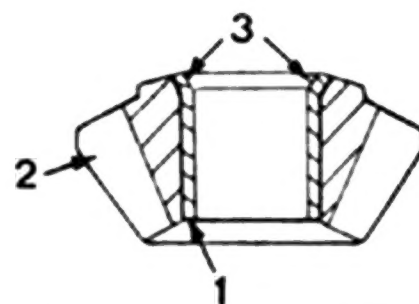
Press bushings (1) into pinion gears (2), then bend back locating tabs (3).
